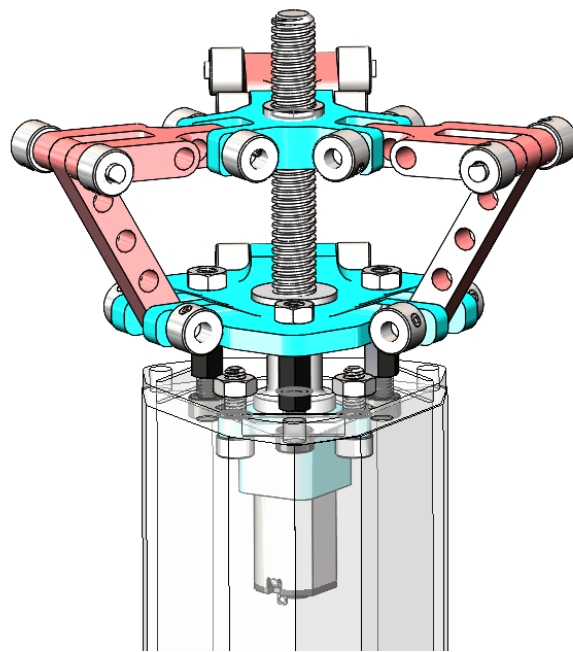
Slider-Crank mechanism CAD assembly rendering from 2022 Iteration Report [1]
